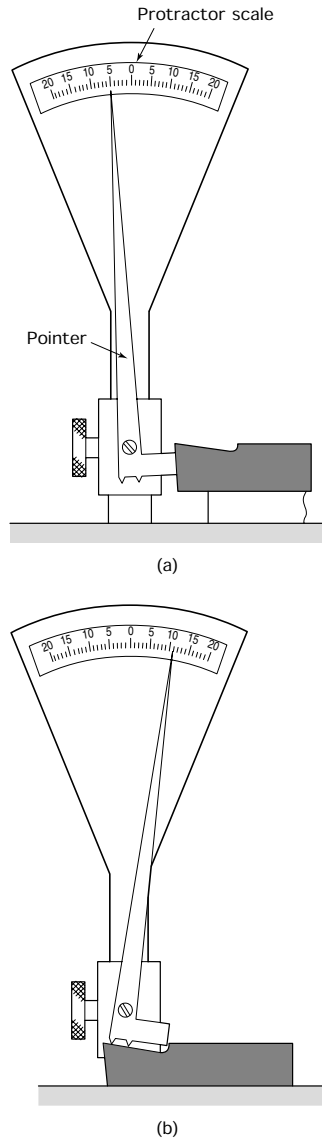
Lathe tool protractor: (a) checking the clearance angle; (b) checking the rake angle
